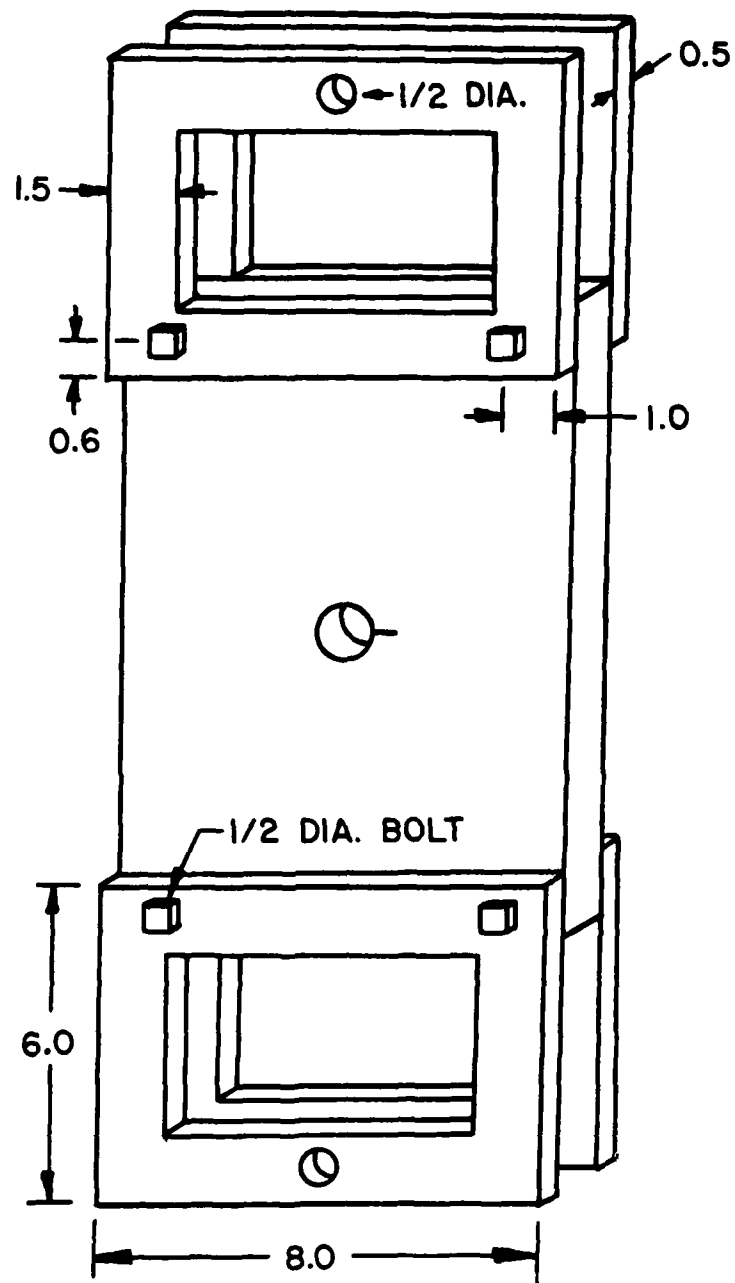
Schematic View of a Plate Specimen Fastened to the Test Grips (All Dimensions in Inches)
